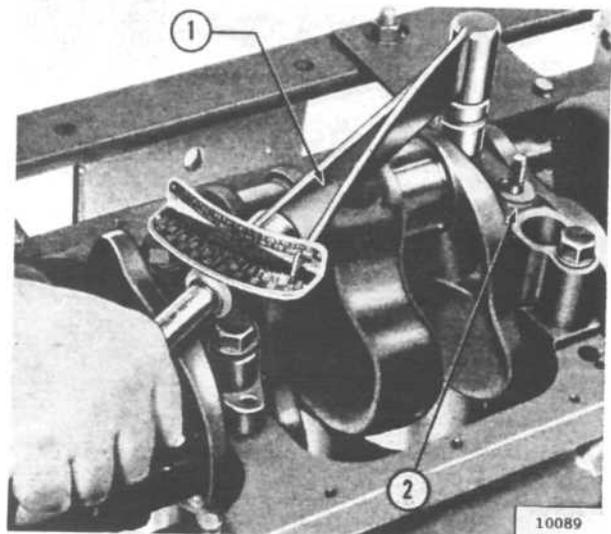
TIGHTENING MAIN BEARING CAP BOLTS
